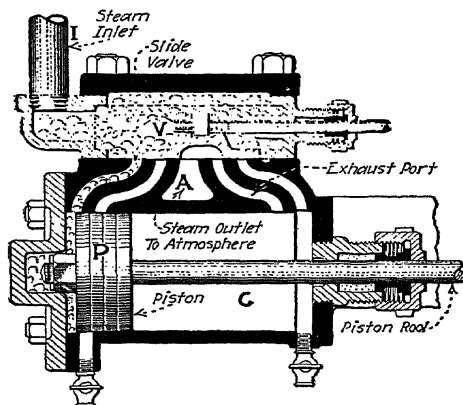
Section through cylinder and valve of a direct-acting steam pump.
